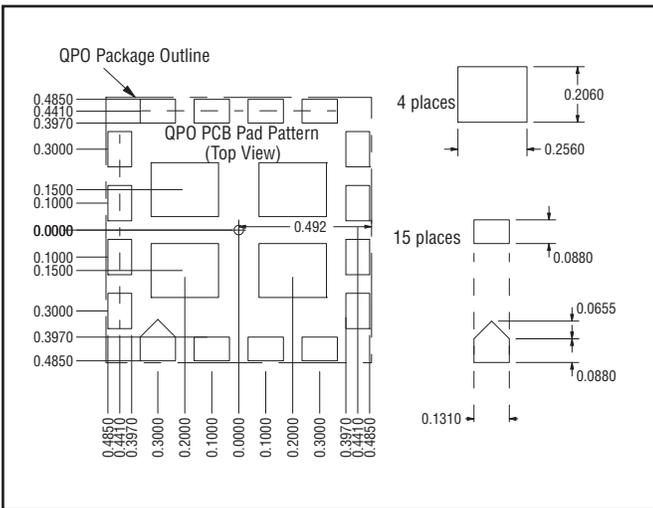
LAND GRID ARRAY PCB Solder Mask Openings (dimensions in inches)
